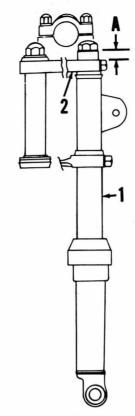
Distance (A) from top side of upper fork bracket (2) to top of inner fork tube (1) should be 12 MM on TS models.
